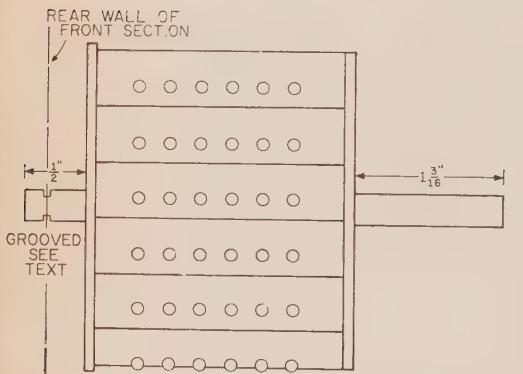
The TV turret is modified to fit the chassis fabricated as in fig. 2.
